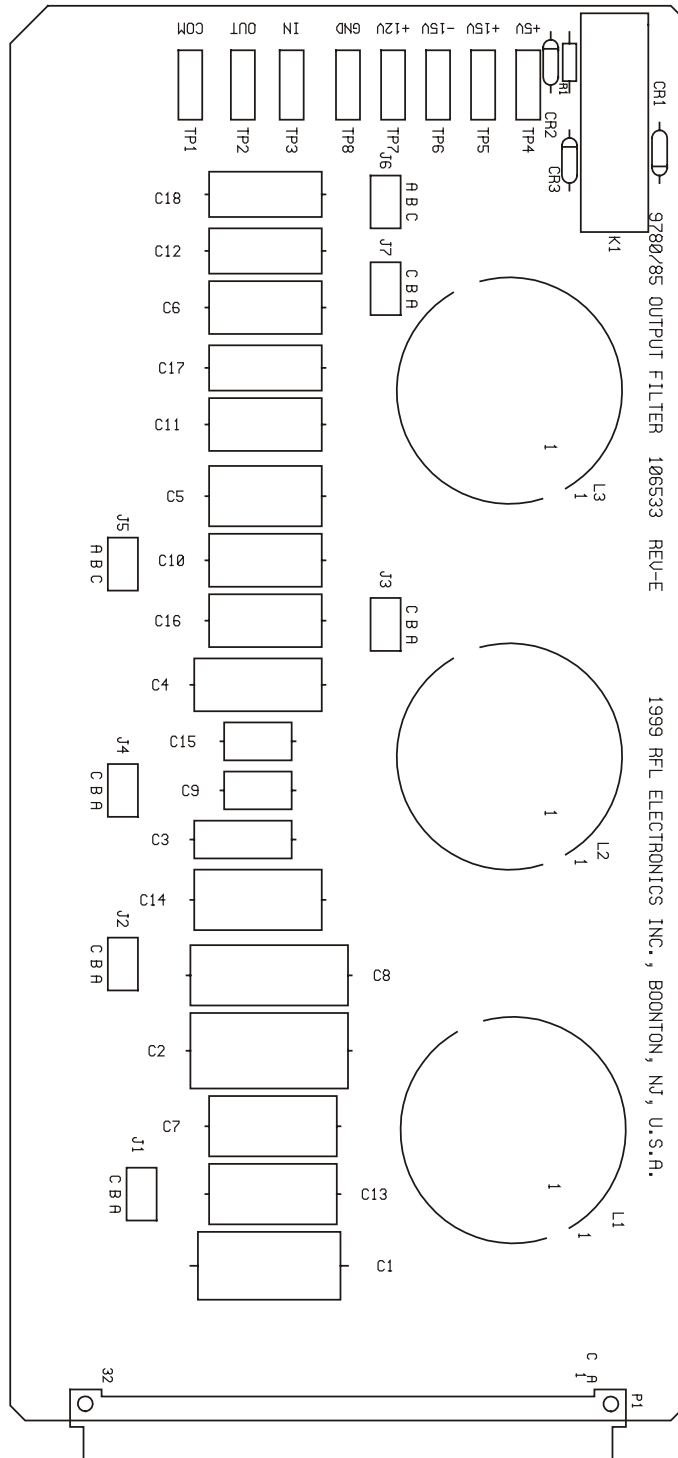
Component locator drawing, RFL9785 Output Filter Module (Assembly No. 106530-1 to -5)
